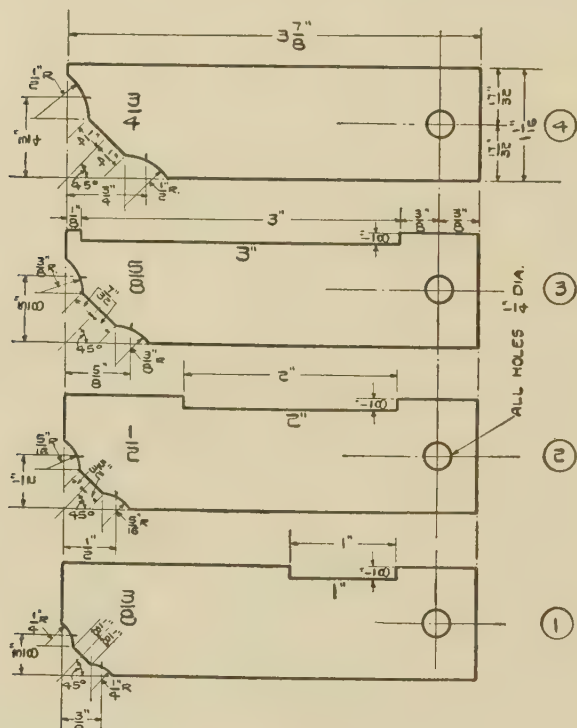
Weld gage for standard and intermittent fillet welds.
